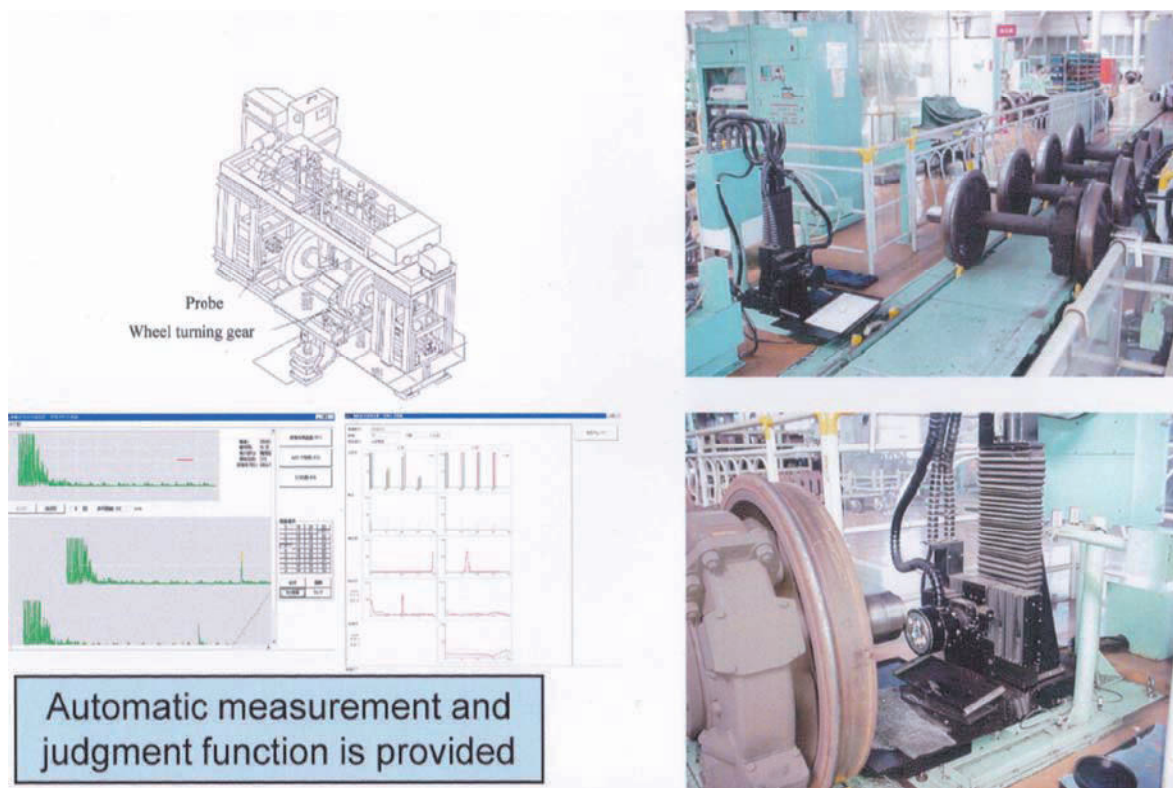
Ultrasonic Flaw Detector (for Bogie & General Inspection)
